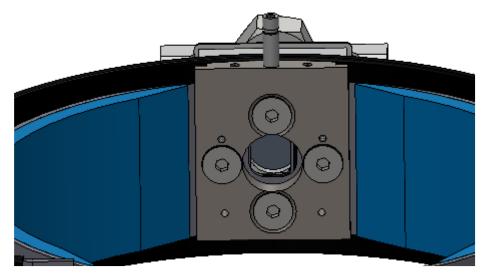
Shoulder inner rib clamp and shoulder foam pin installed
